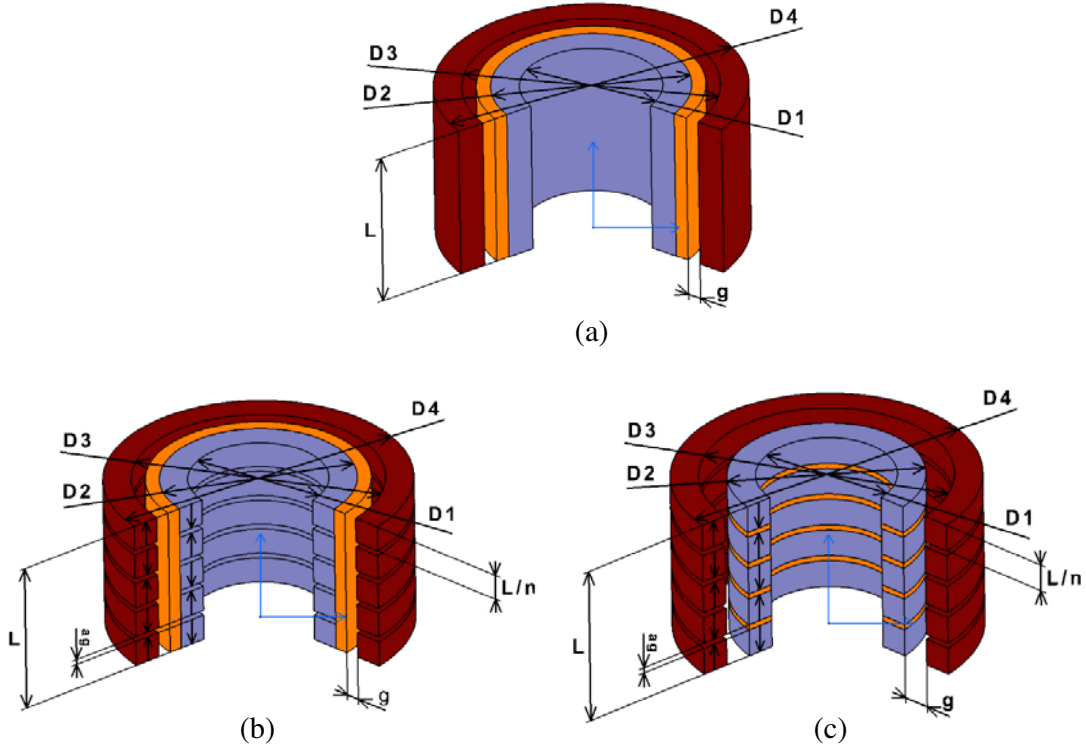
Magnetic bearing configurations with ECD, (a) monolithic with copper plate on rotor ring, (b) MPMTB with a copper plate on the rotor rings, and (c) MPMTB with copper rings between axial stacks.
